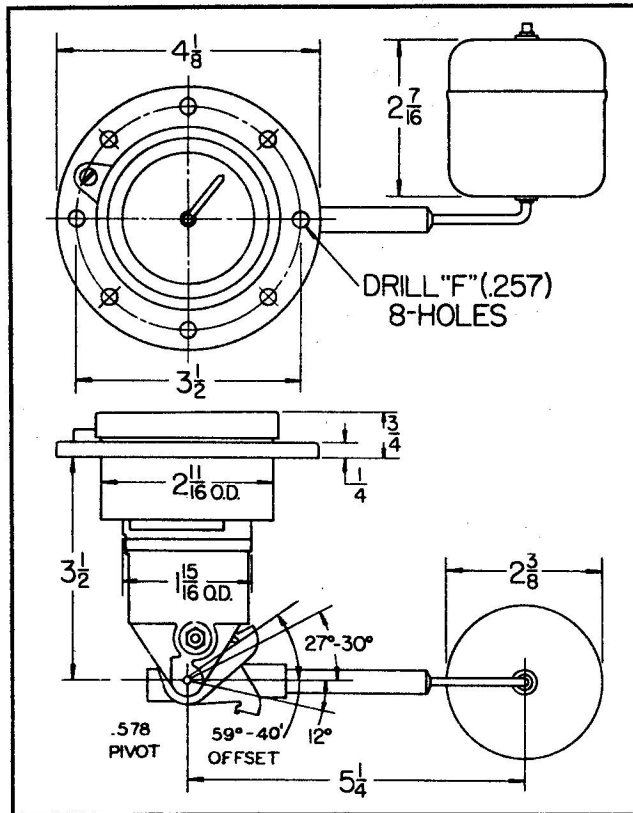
General Dimensions, Tank Unit No. EA503-729
